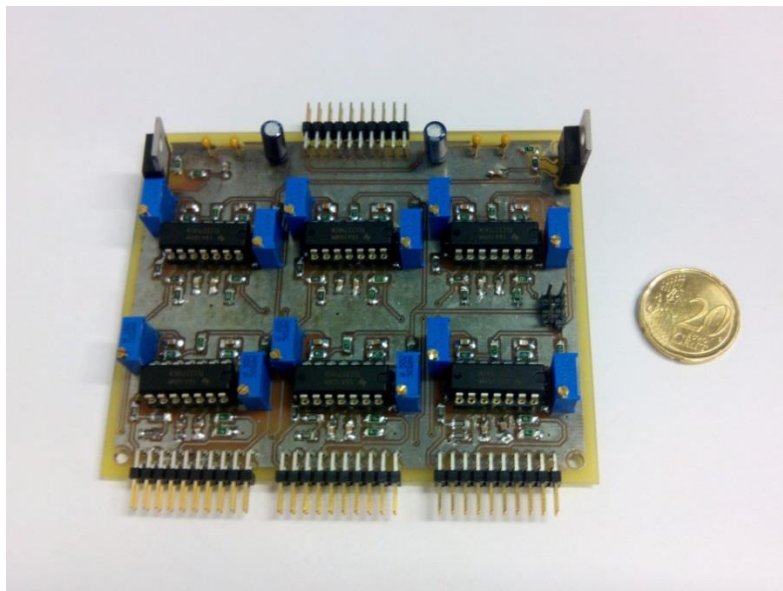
Picture of the filter PCB for 6, 7, 8 and 9 kHz.
